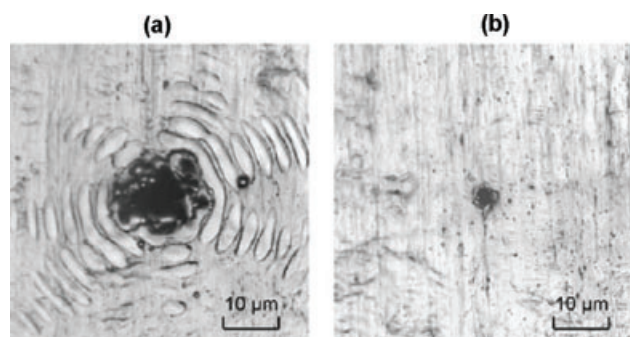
Scanning laser microscope images of a hole drilled using a Bessel beam into a stainless steel sheet with a thickness of 20 µm. (a) Irradiated surface, with the characteristic marks of left by the Bessel rings; (b) rear surface, with a hole smaller than at the entrance showing tapering [56].
